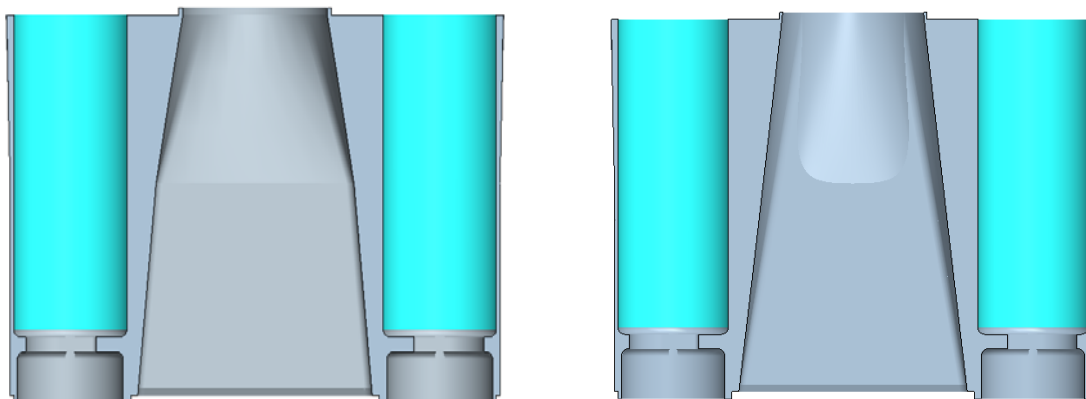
Mercury Vessel Transition before (left) and after modification to allow center section to be machined complete with wire EDM
